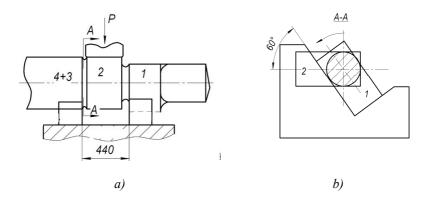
Sketch installing of the six-throw crankshaft for turning throw 2 (a), turning the throw 2 by the 60° angle (b)
